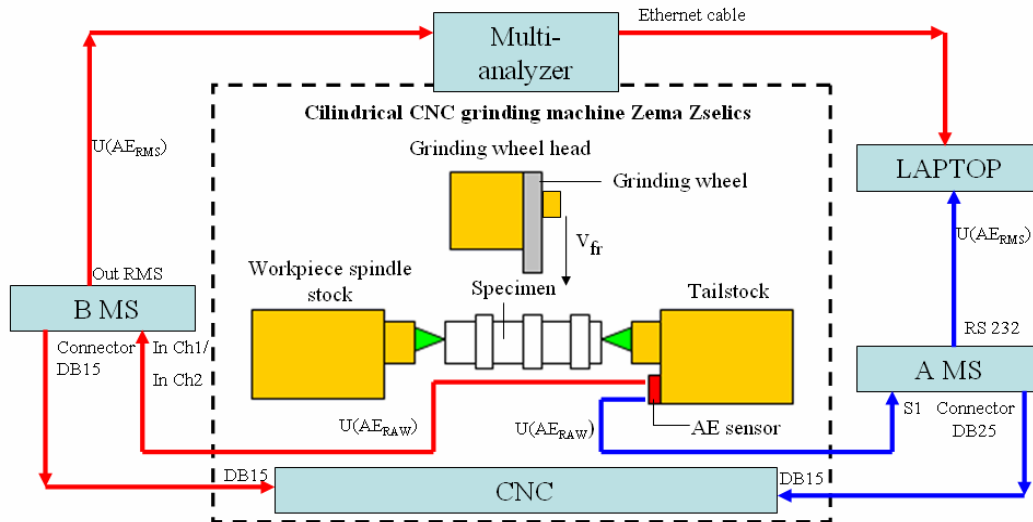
Experimental set up during tests to the recognition of contact between grinding wheel and workpiece.
